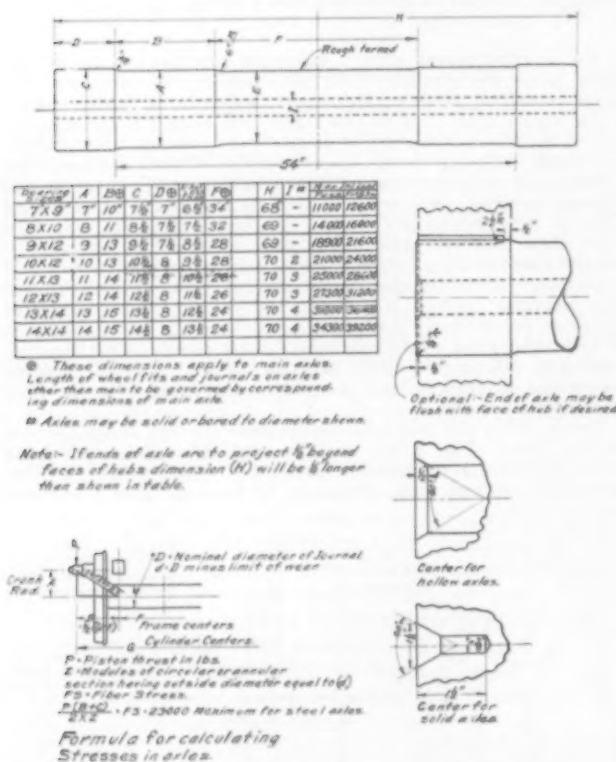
Sizes and Dimensions of Recommended Driving Axles
